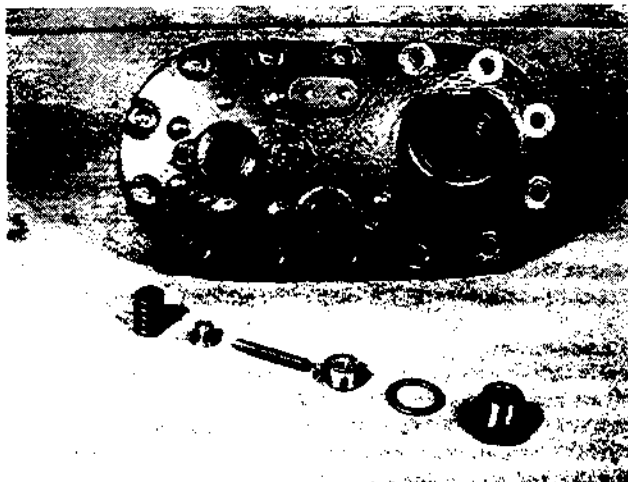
Bevel Spring and Adjusting Screw Assembly
